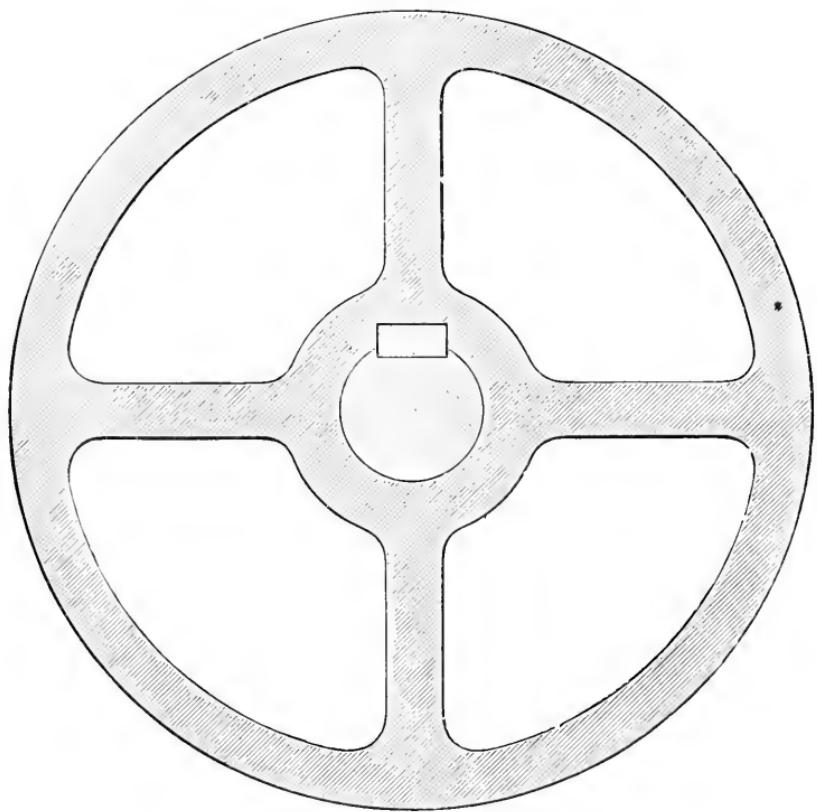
SECTION SHOWING BOSS OF WHEEL SECURED TO SHAFT
